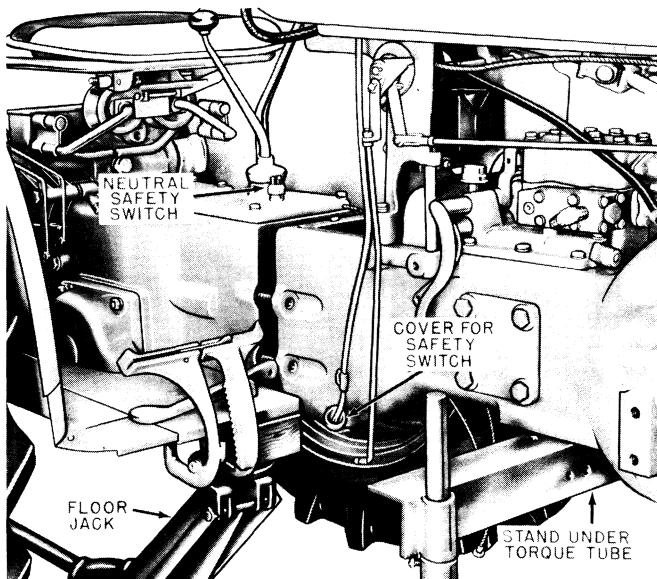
Splitting Tractor at Rear End of Torque Tube
